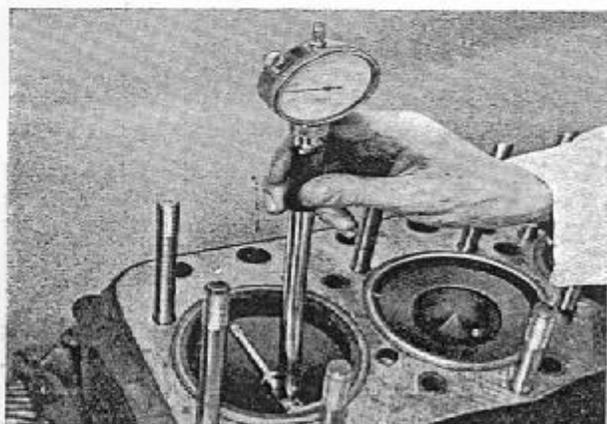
Measuring the cylinder bore. Zero the indicator on the upper edge of the liner.
